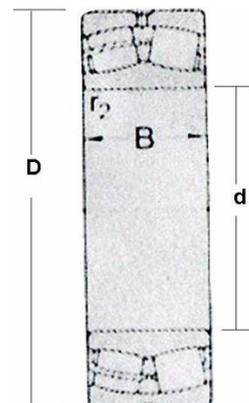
Spherical Roller Bearing (SAE Bearing manual)
